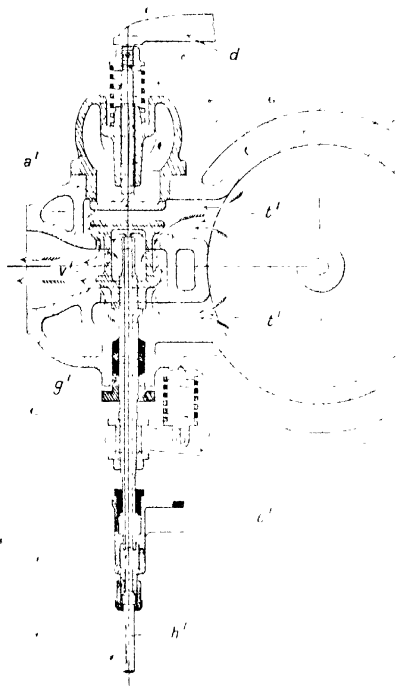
A. — Cross sectional elevation of cylinder head of horizontal gas engine, showing double-seated balanced-action water-cooled exhaust valve arranged vertically — Butler.
